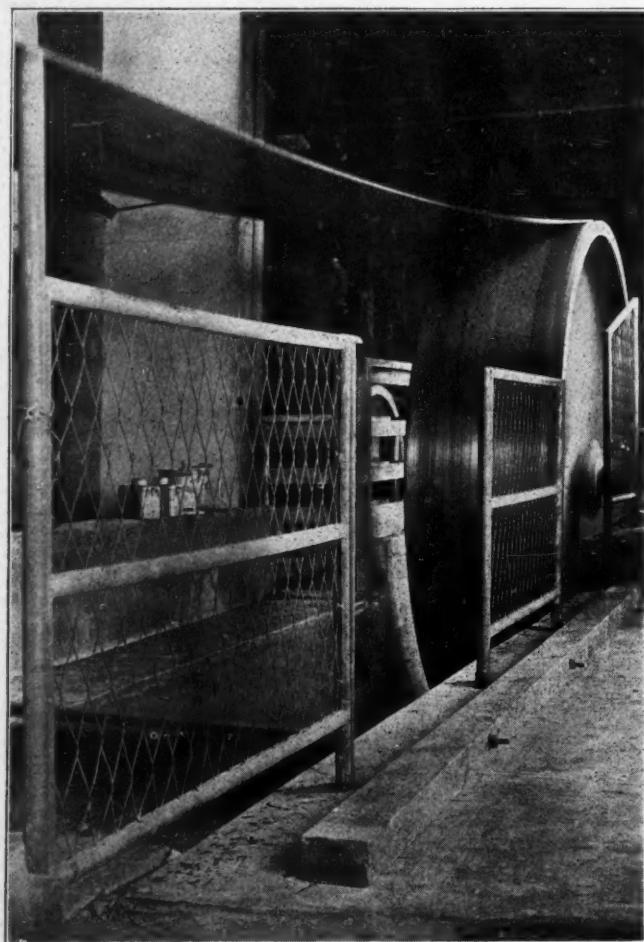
WELDED PIPE USED AS GUARD
